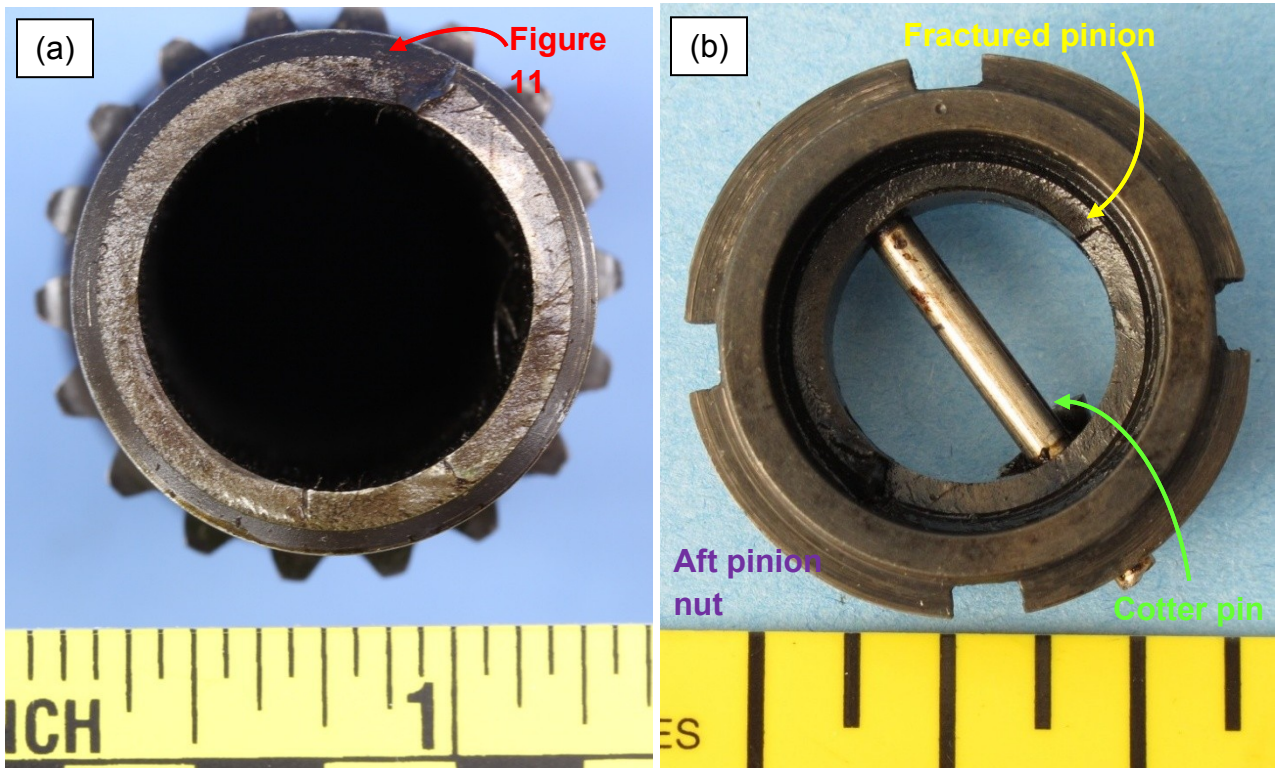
The (a) forward and (b) aft faces of the pinion fracture, as received. The aft side fracture was still threaded in the aft nut with the cotter pin in place. The area labeled in (a) is highlighted in Figure 11.
